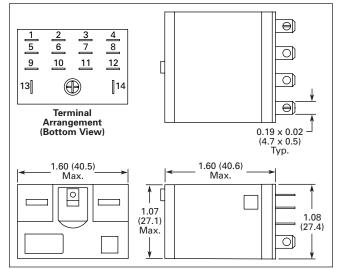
D7PF4 — Approximate Dimensions in Inches (mm)
